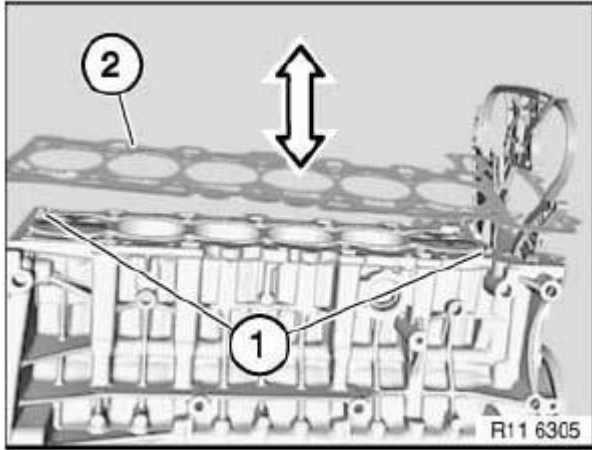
Identifying Head Gasket And Adapter Sleeves
